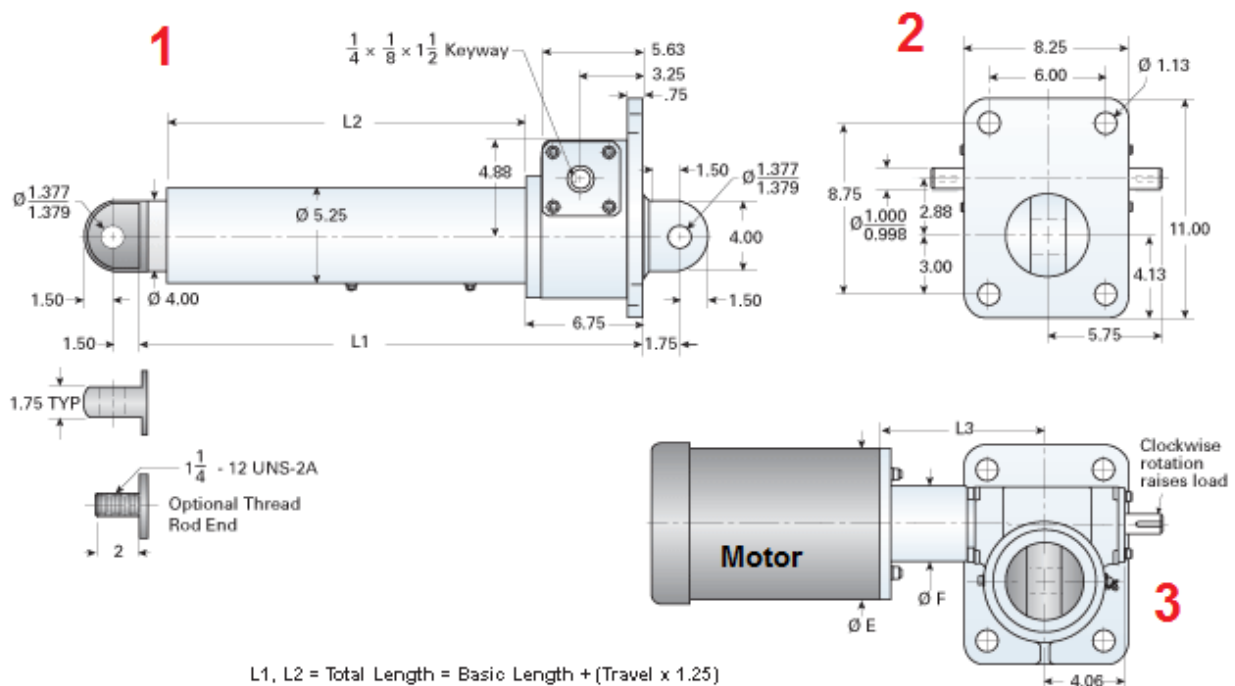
7 - 2D sketch of electric cylinder stabilizer
